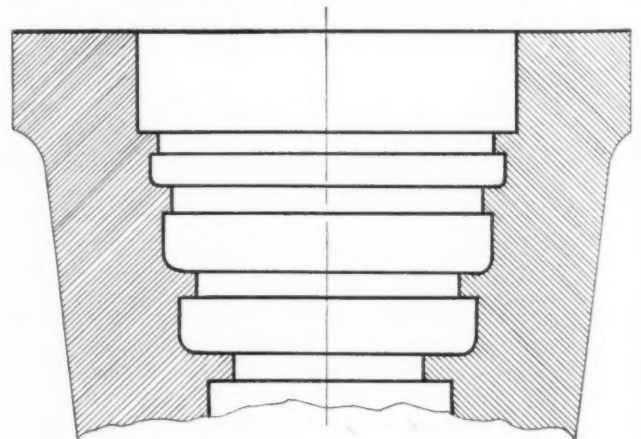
TYPICAL EXAMPLE OF WORK DONE ON THE BORING MILL SHOWN IN FIG. 2
